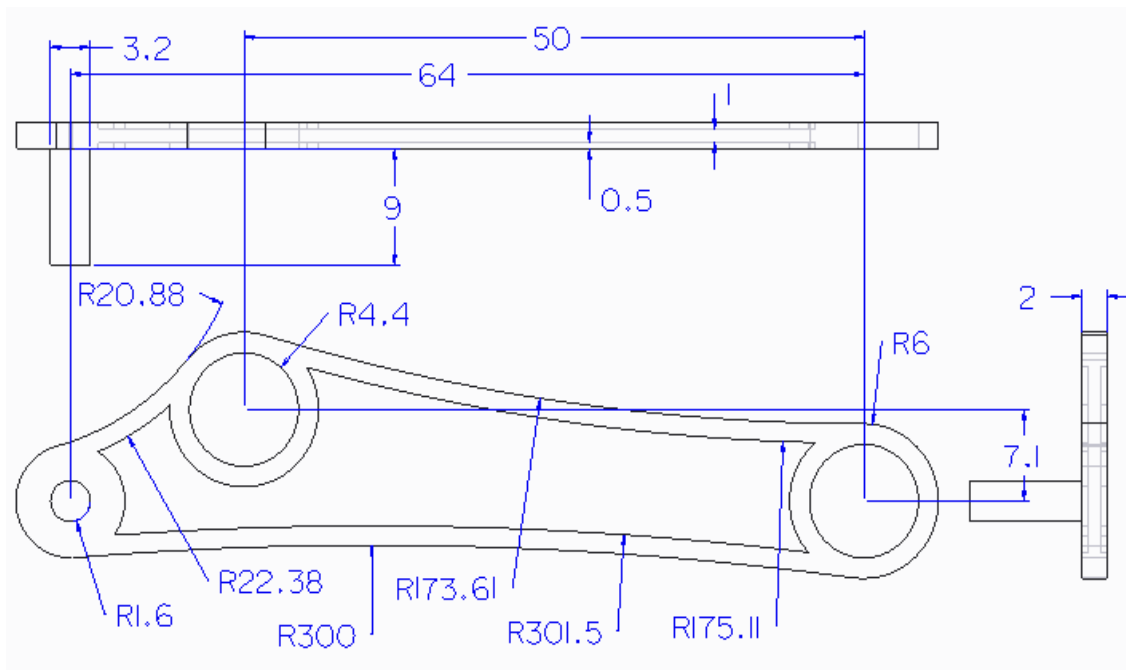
CAD Drawing of Rocker Link of Secondary Mechanism
